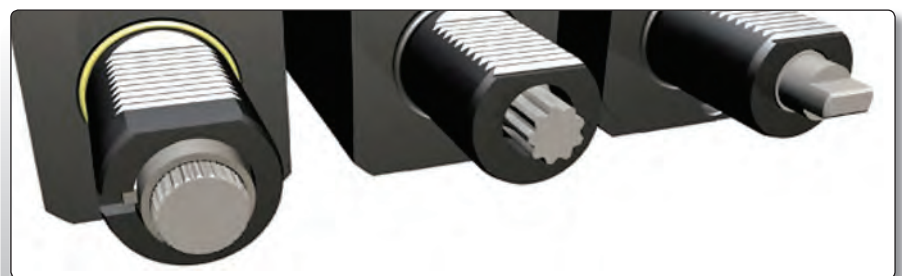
Tool shanks and types of clutches driving the rotary tools [Sauter]
